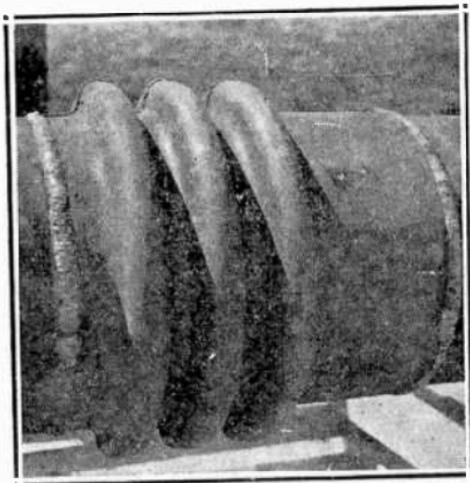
,176.—A type of expansion joint used in arc welding pipe lines. This type of joint is known in pipe line parlance as a *wrinkle belly* joint.
